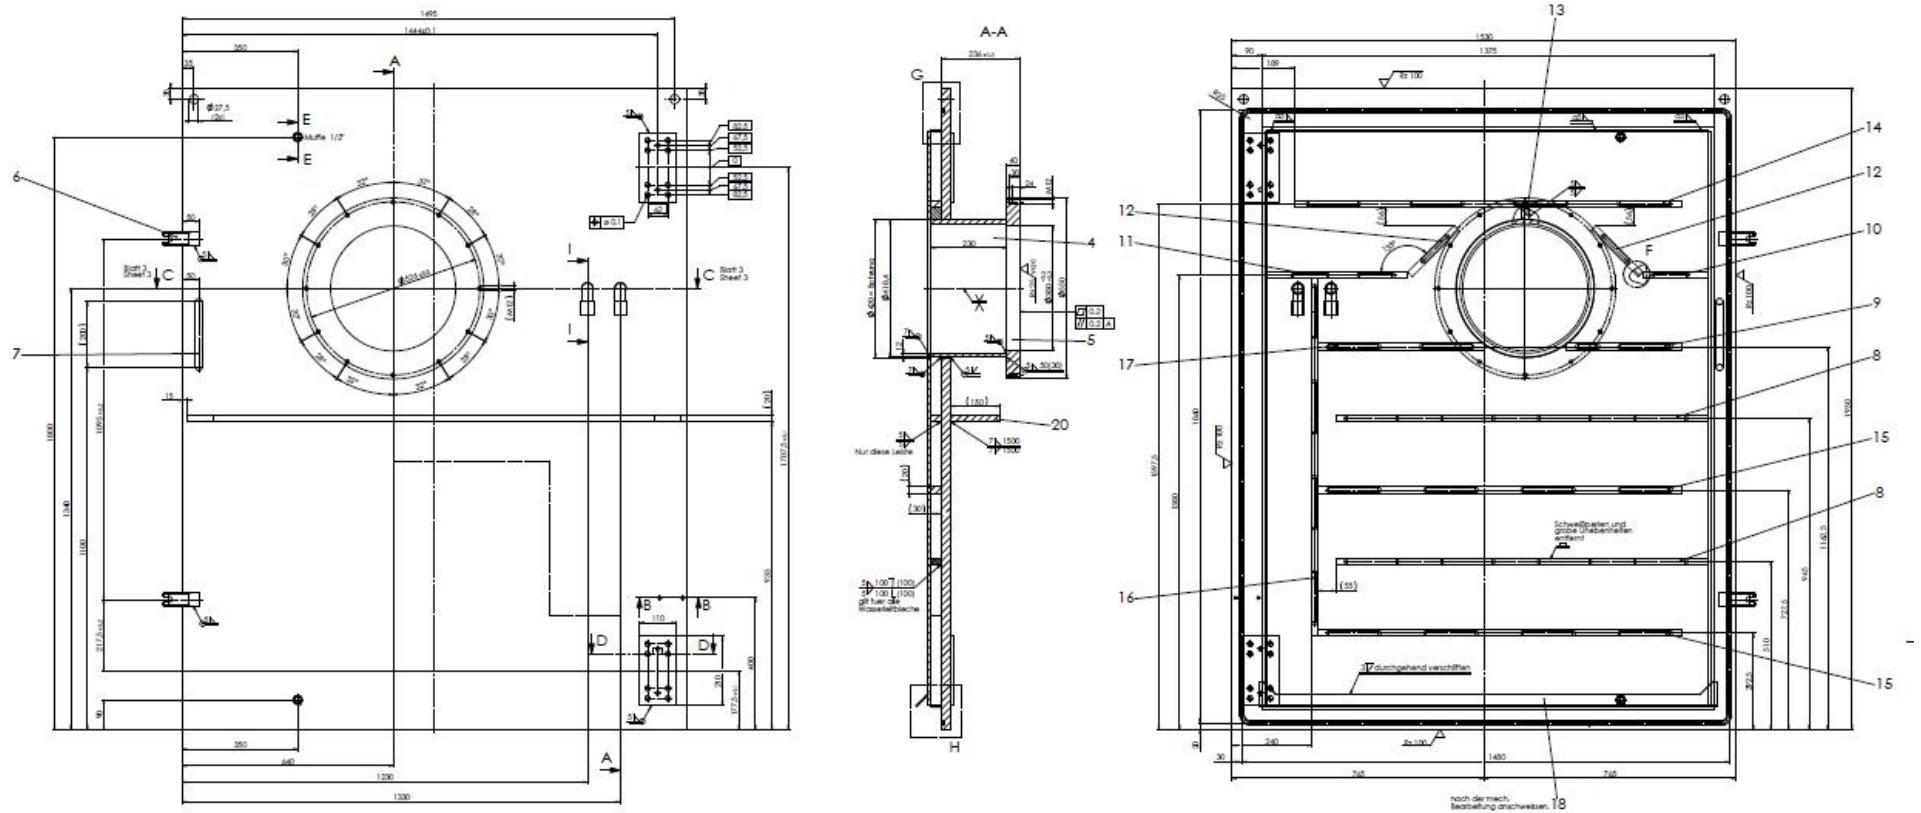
Drawing of door of vacuum chamber made of carbon steel S355 and stainless steel 0H18N9
